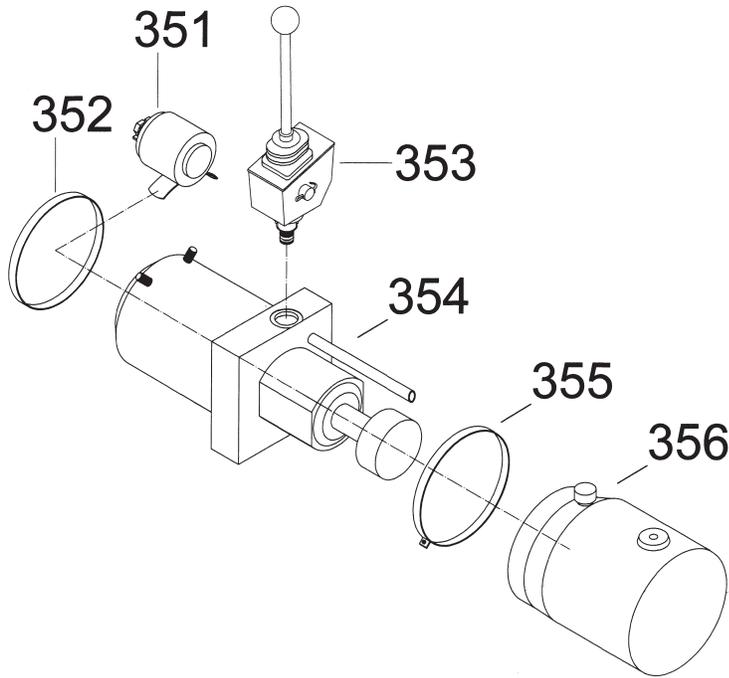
Repair Parts Illustration for 11K279, Pump Motor Unit
